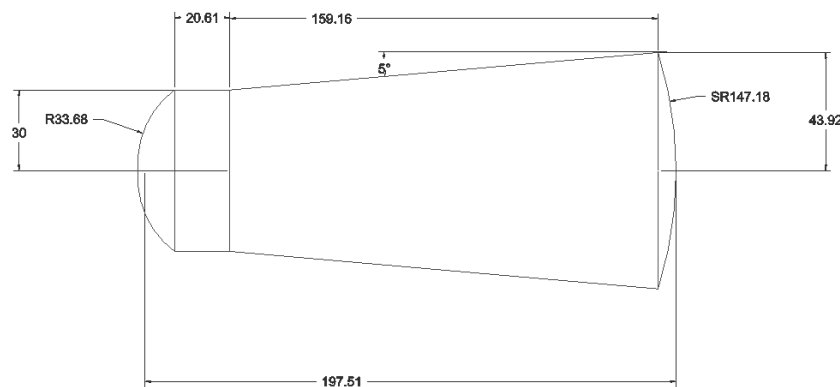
Dimensions of the re-entry capsule (all dimensions in mm)
